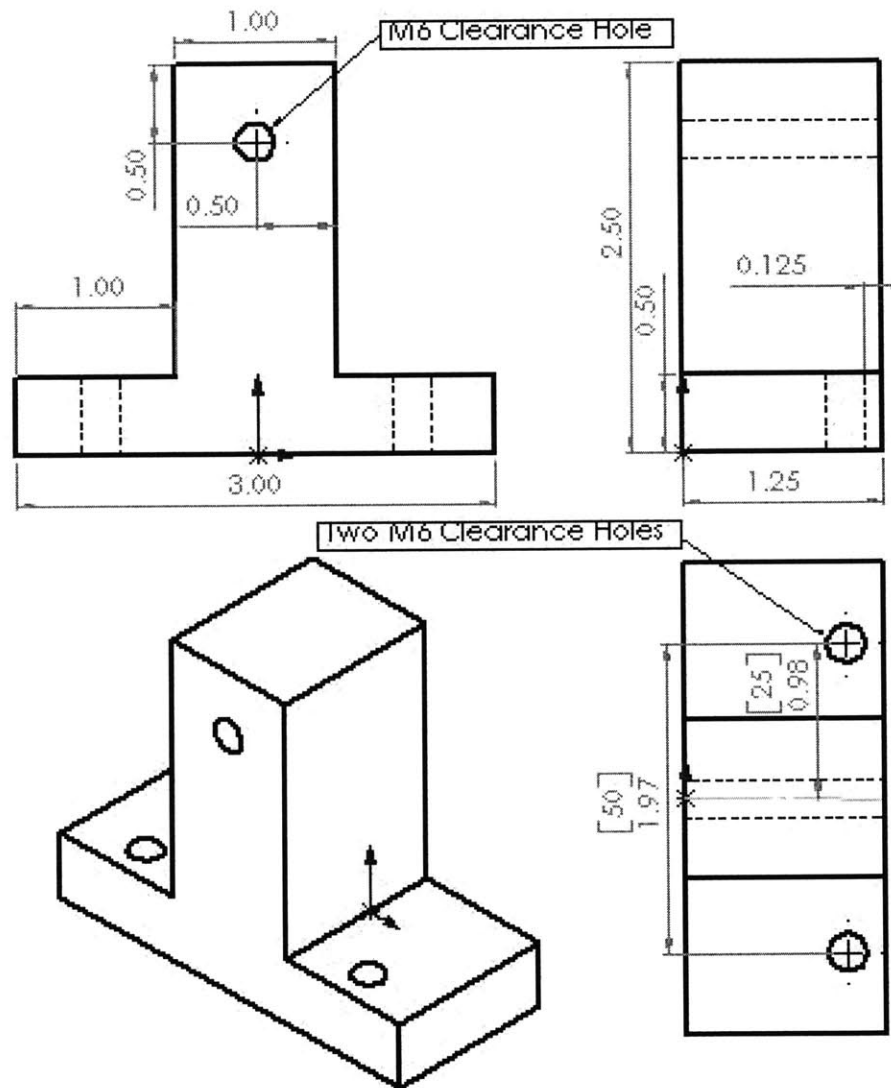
Dimensions of the mount for the backing plate of the magnet-across-coils system coils.
